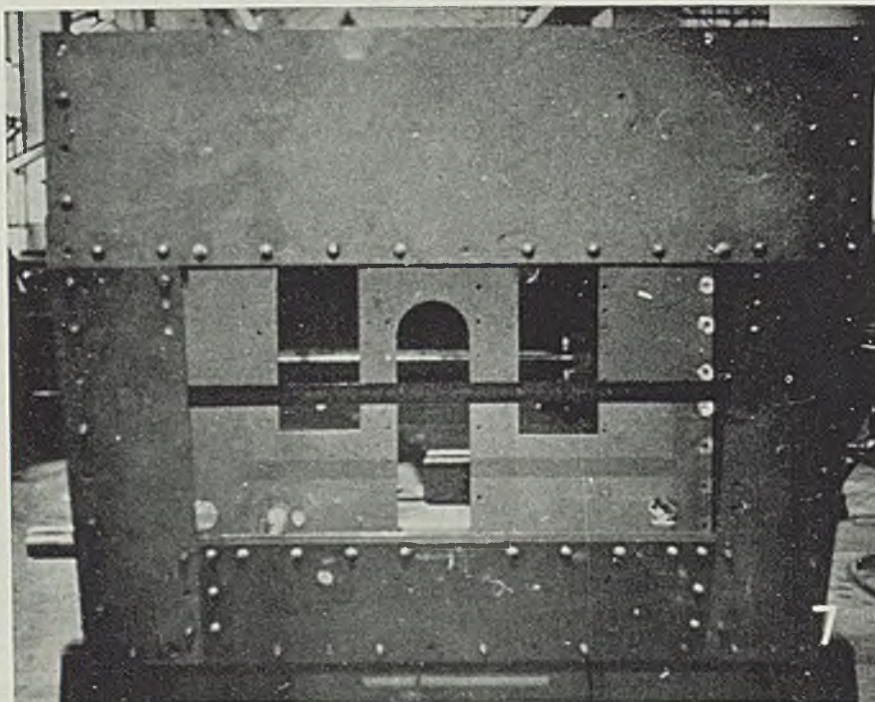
Rear view of same hull showing engine compartment in the rear of the fighting compartment
